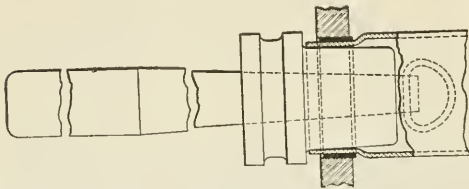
Method of Tightening Tube in Back Tube Sheet
